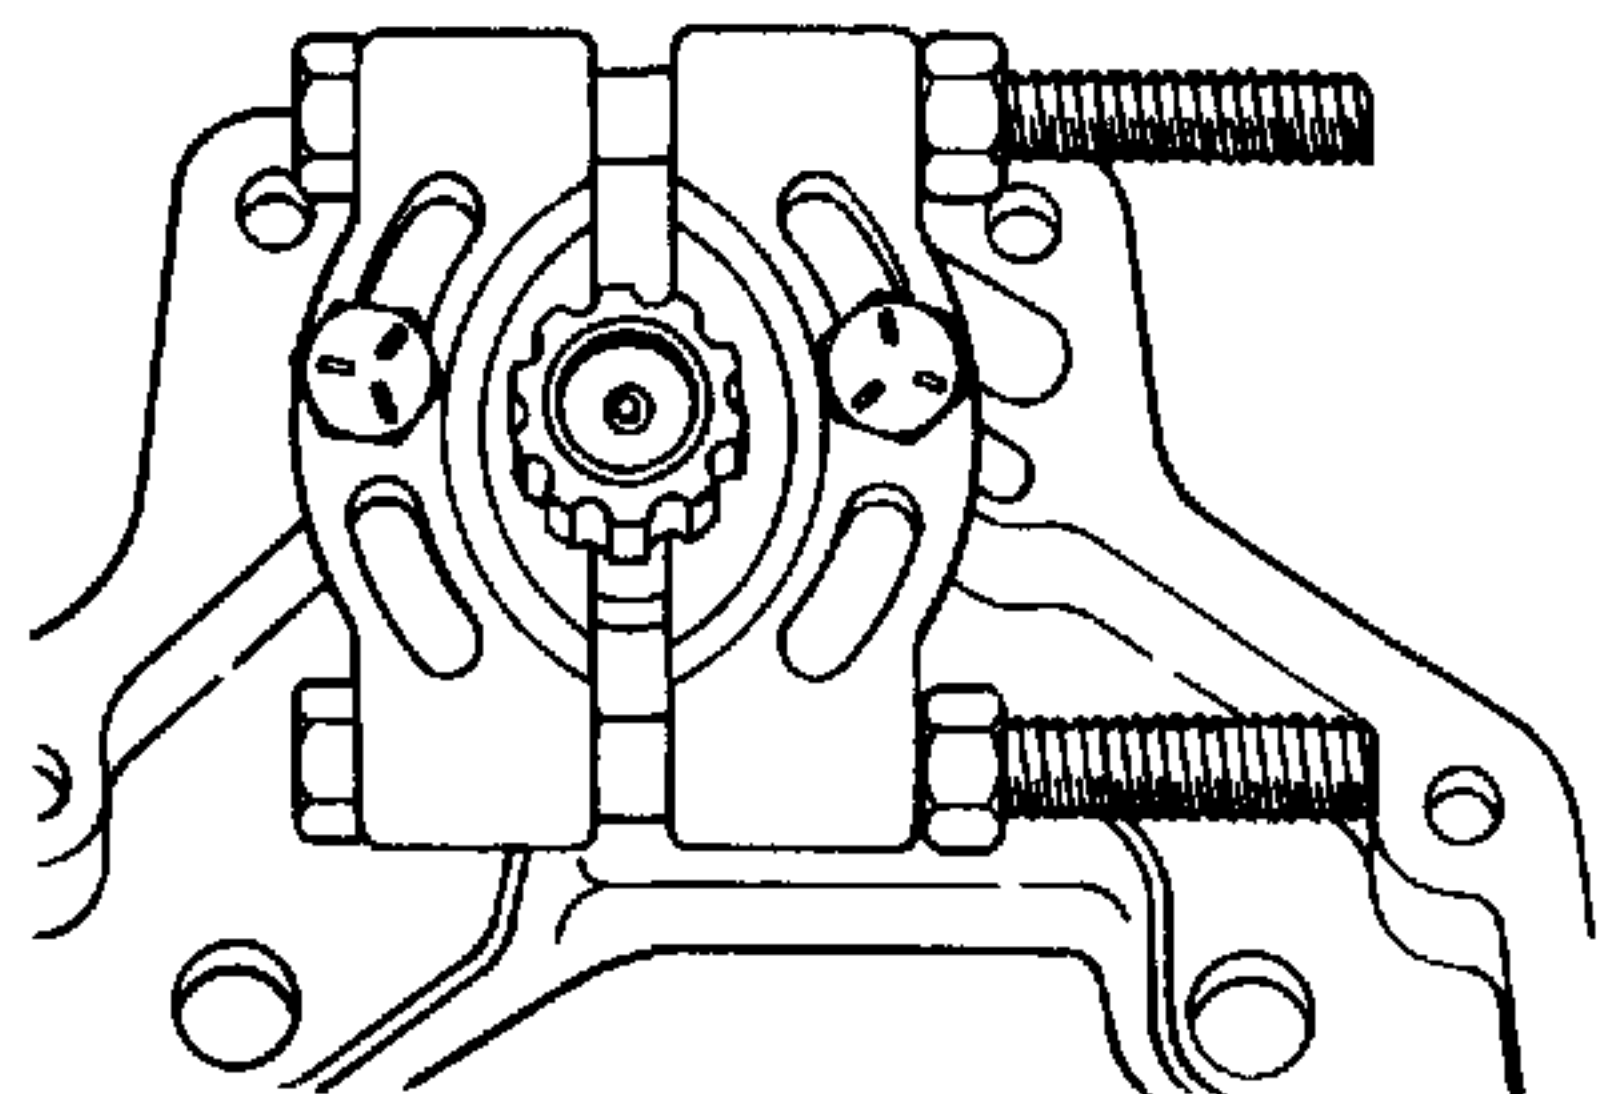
Using Splined Coupling and Impact Puller to Remove Input Shaft (Alternative Method).
